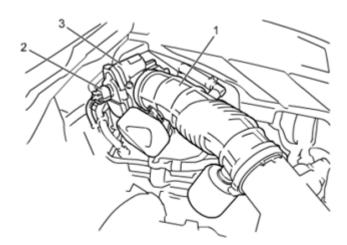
Identifying Air Cleaner Outlet Hose And Throttle Body Connector With Throttle Body Courtesy of SUZUKI OF AMERICA CORP.
